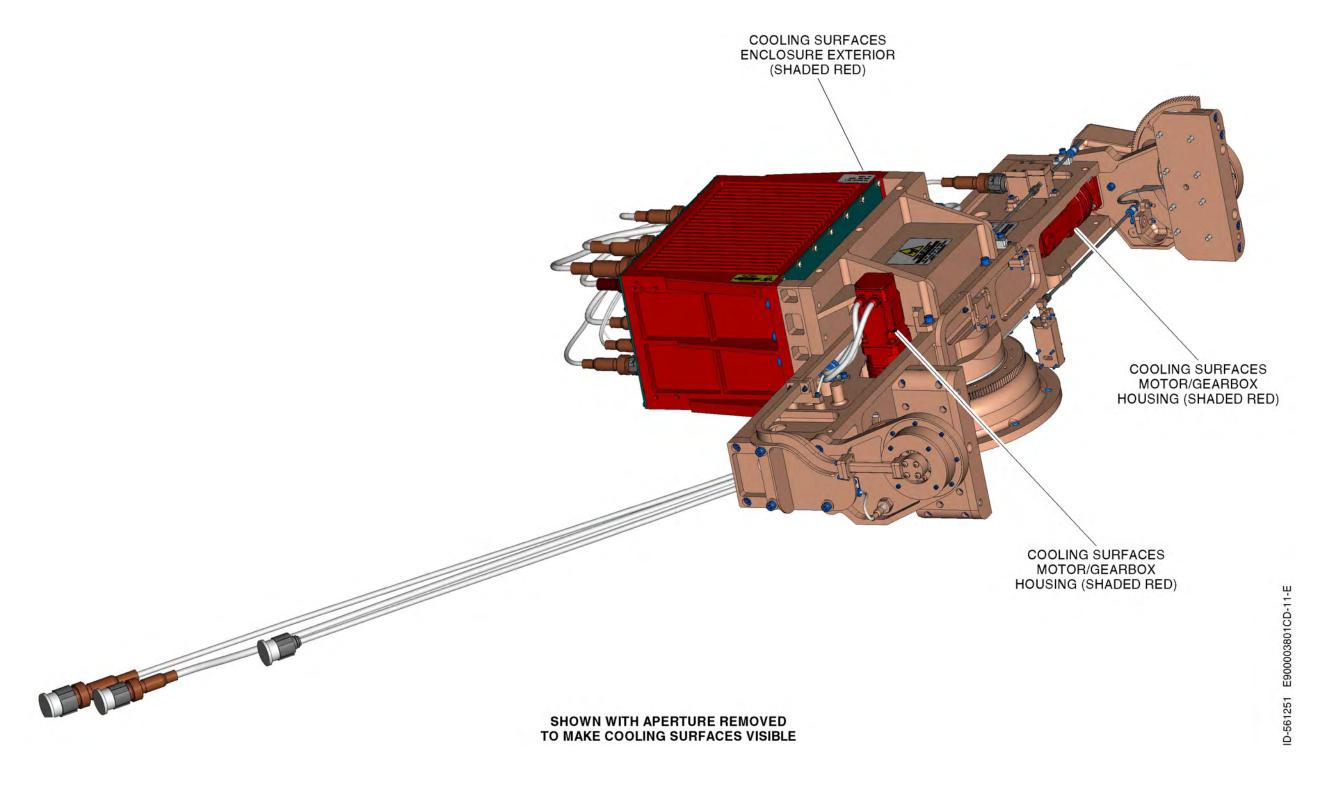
FMA Outline and Installation Drawing (Sheet 11 of 12)
